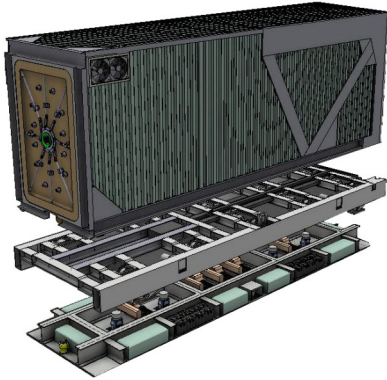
Exploded view of the CPRHS (image courtesy of Fusion for Energy)
